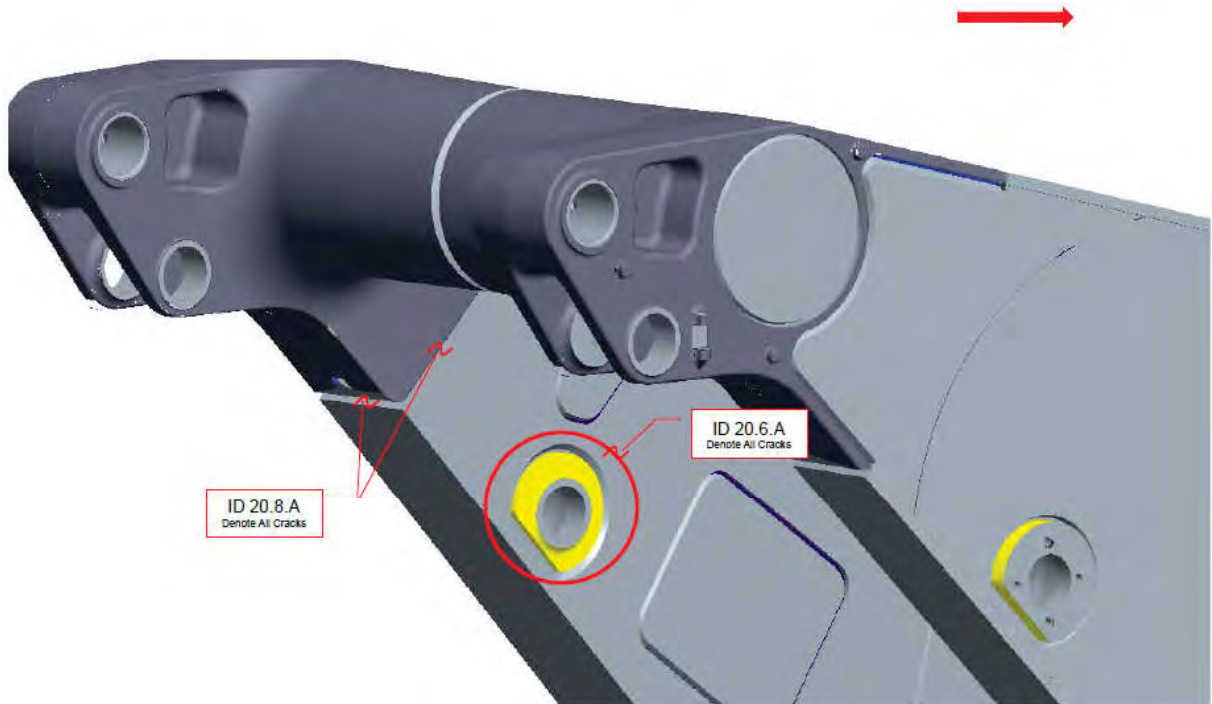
Chassis Inspection Guideline: Driver Side Inside Rear A-Arm Boss
